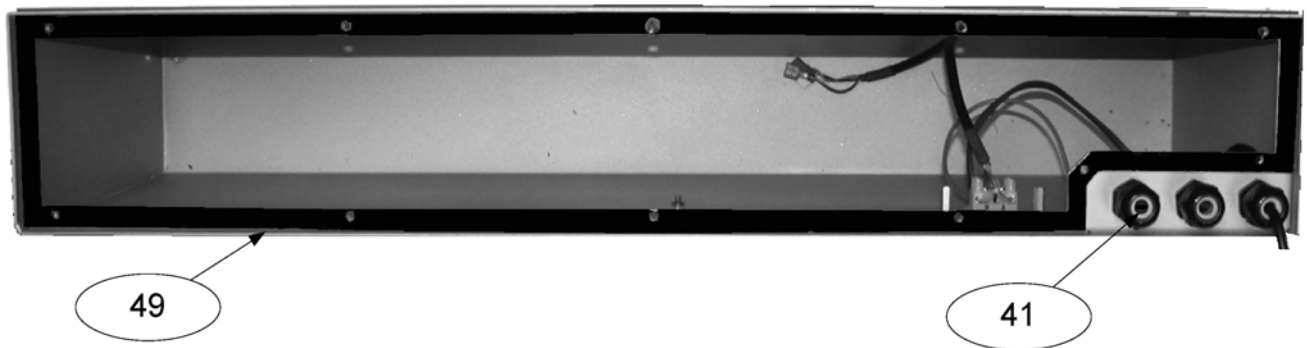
7-Segment Replacement Parts - Enclosure Bottom
